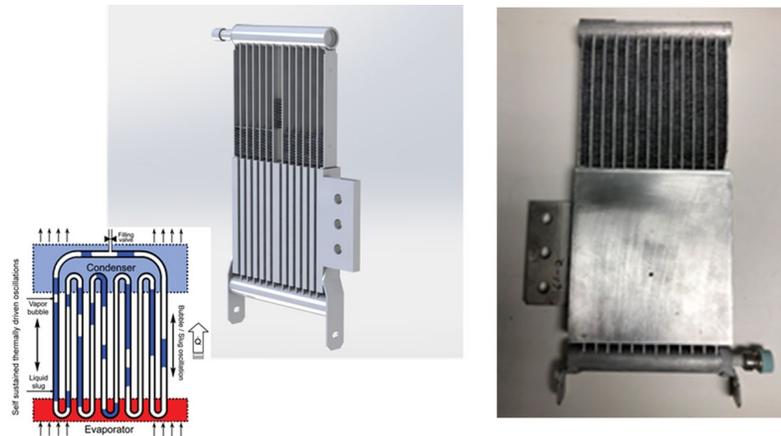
[Left] Advanced thermosyphon design and operating principle [Right] First batch of manufactured advanced thermosyphon for breaker B1
